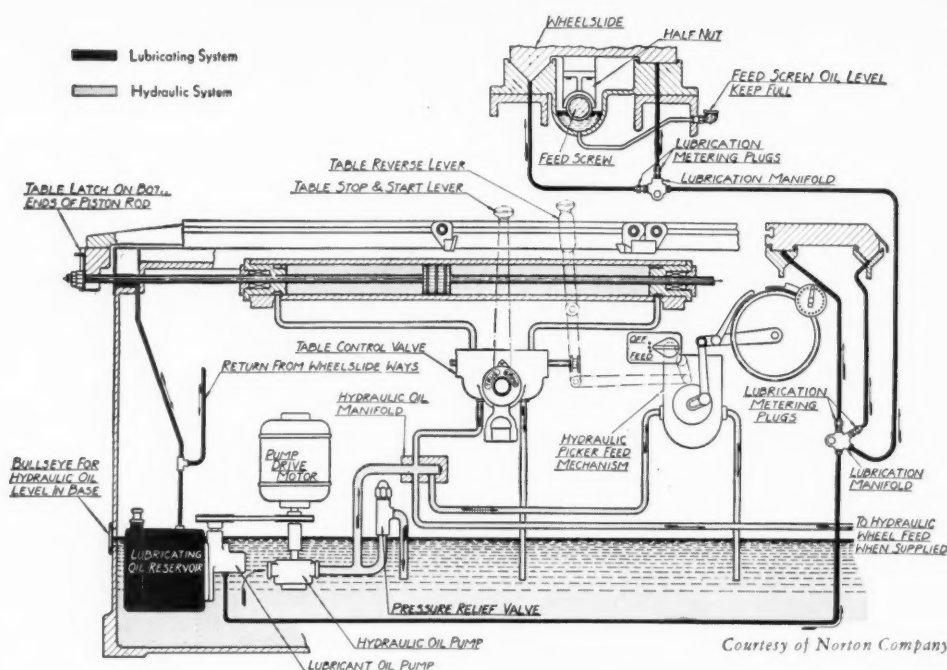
Schematic plan of hydraulic and lubricating system of a 6" Type C Cylindrical Grinding Machine.
